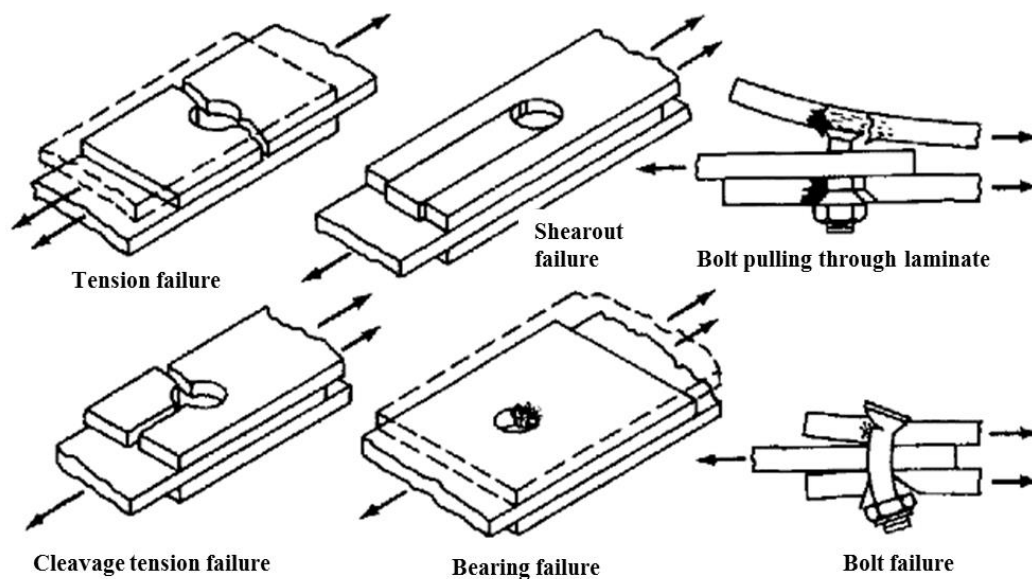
Typical failure modes of mechanical fastening joints²
